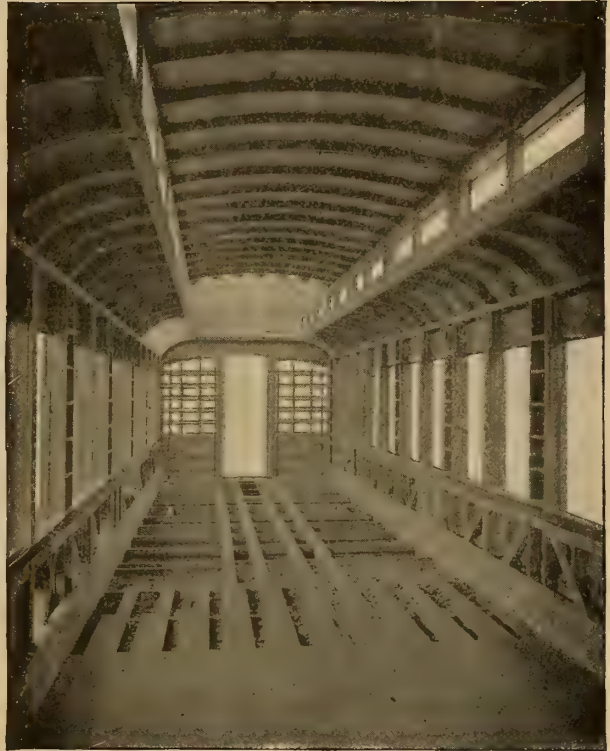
INTERIOR VIEW, SHOWING SILLS, BRIDGING, TRUSS-PLANK, TRUSSING AND SUPERSTRUCTURE.
